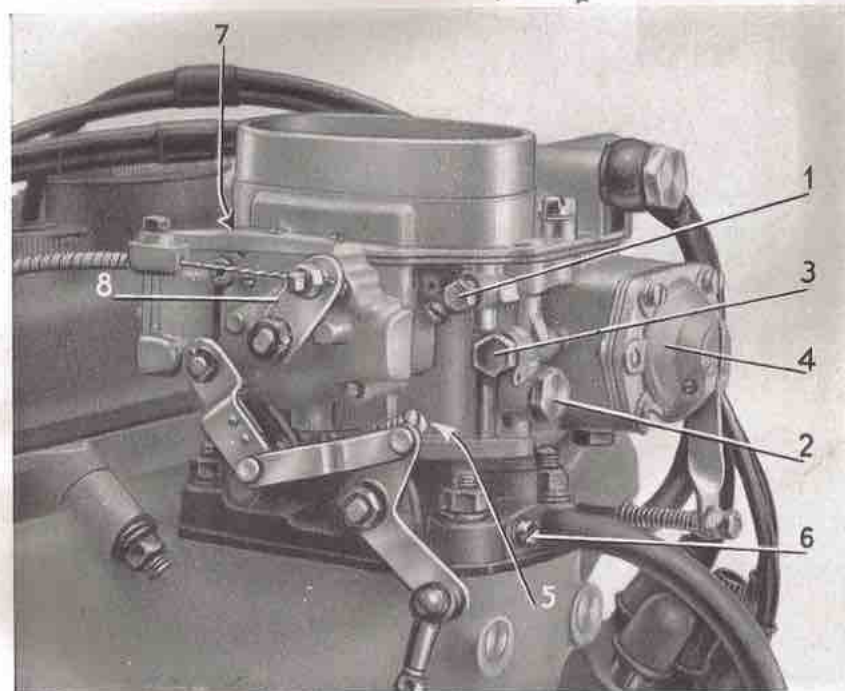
Solex type 32 PAIAT carburettor (Giulietta Sprint).
